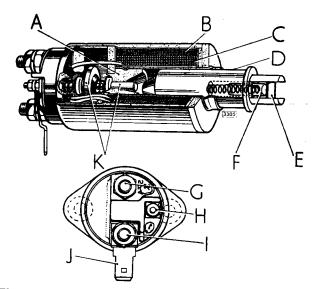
Checking the opening and closing of the starter switch contacts
